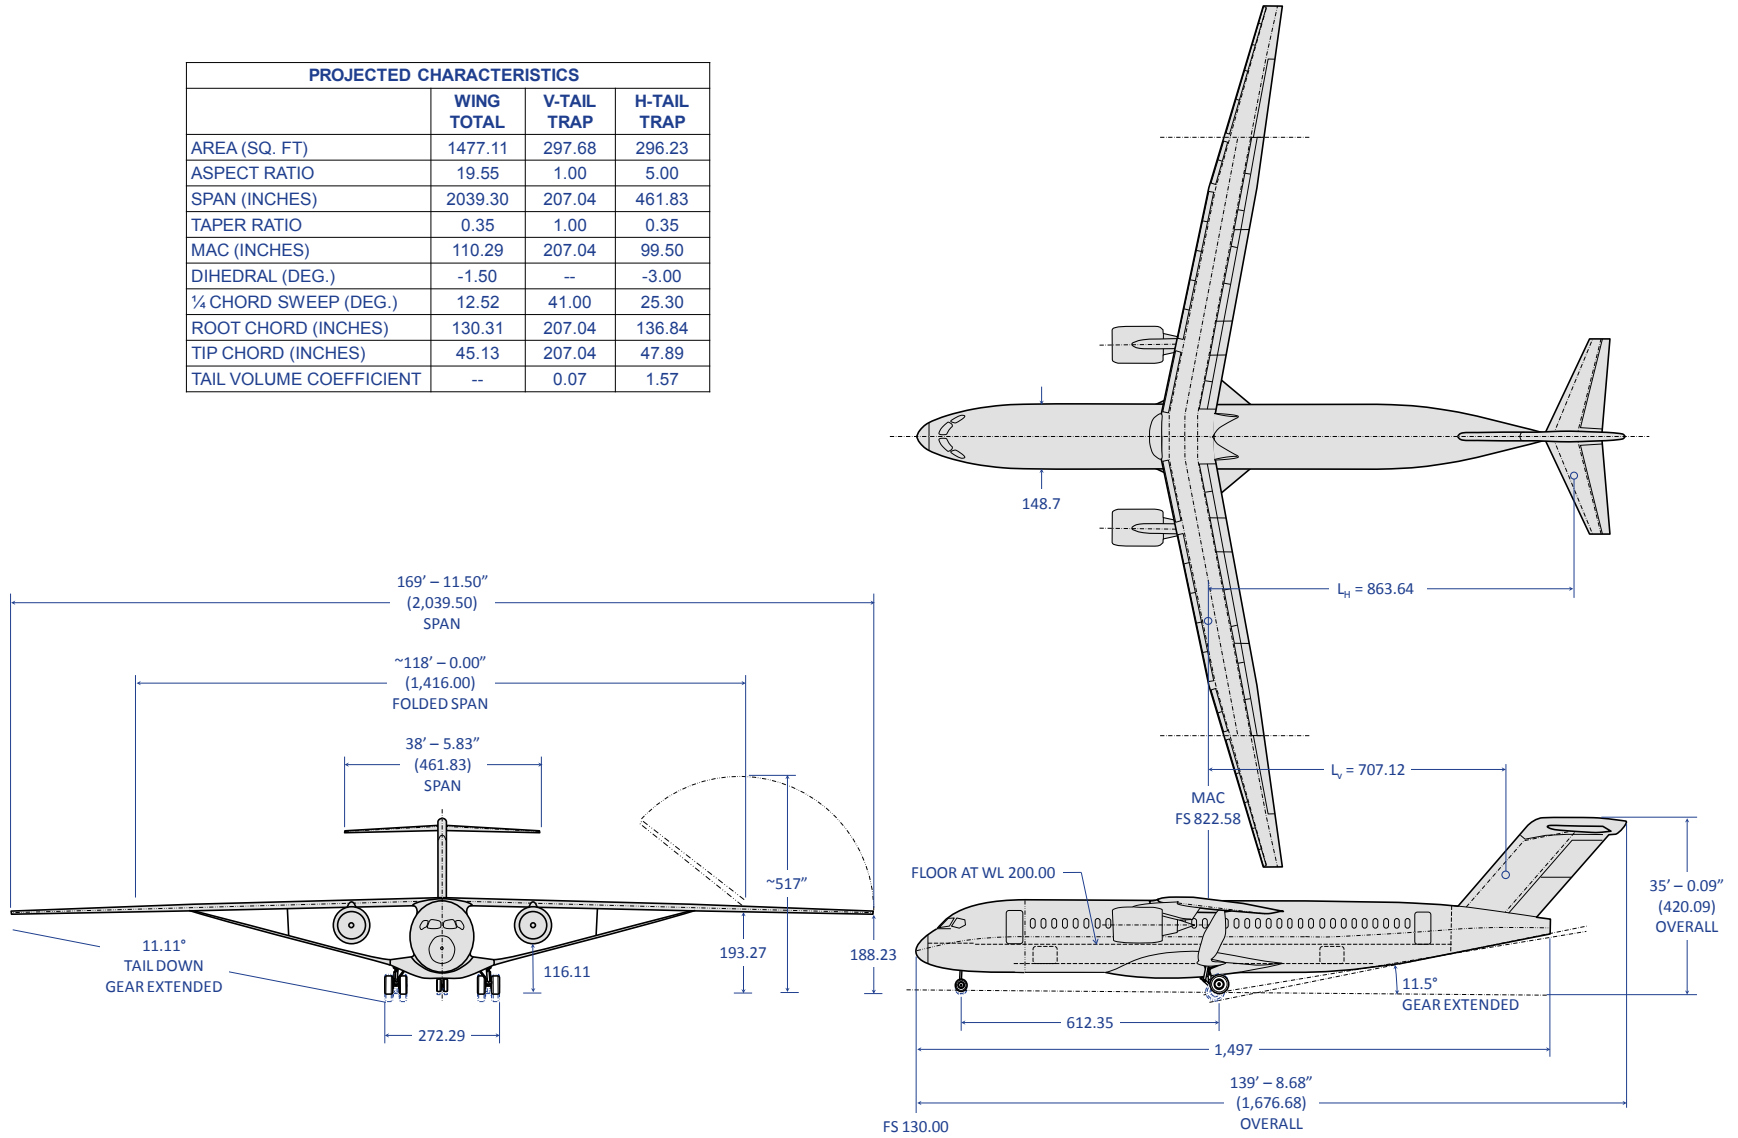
765-095-TS1 – Truss Braced Wing with gFan++
